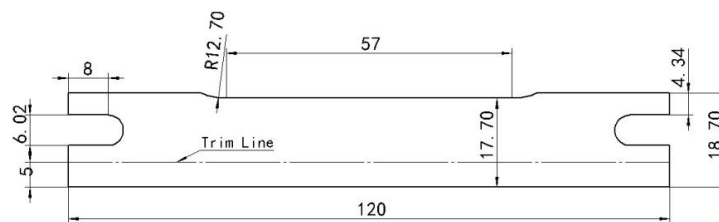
Geometry of the half-dog bone specimen, dimensions in mm
